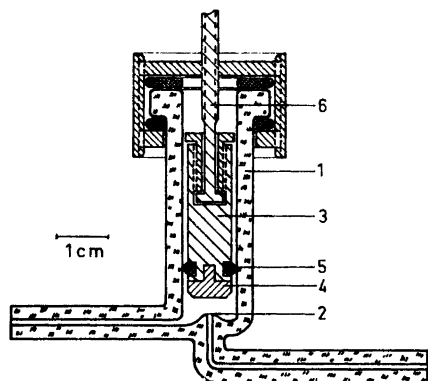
Section through greaseless vacuum valve. 1. Glass tube of Pyrex. 2. Fire-polished seat. 3. Stainless steel plunger. 4. Teflon plug. 5. Viton O-ring. 6. Threaded spindle.
